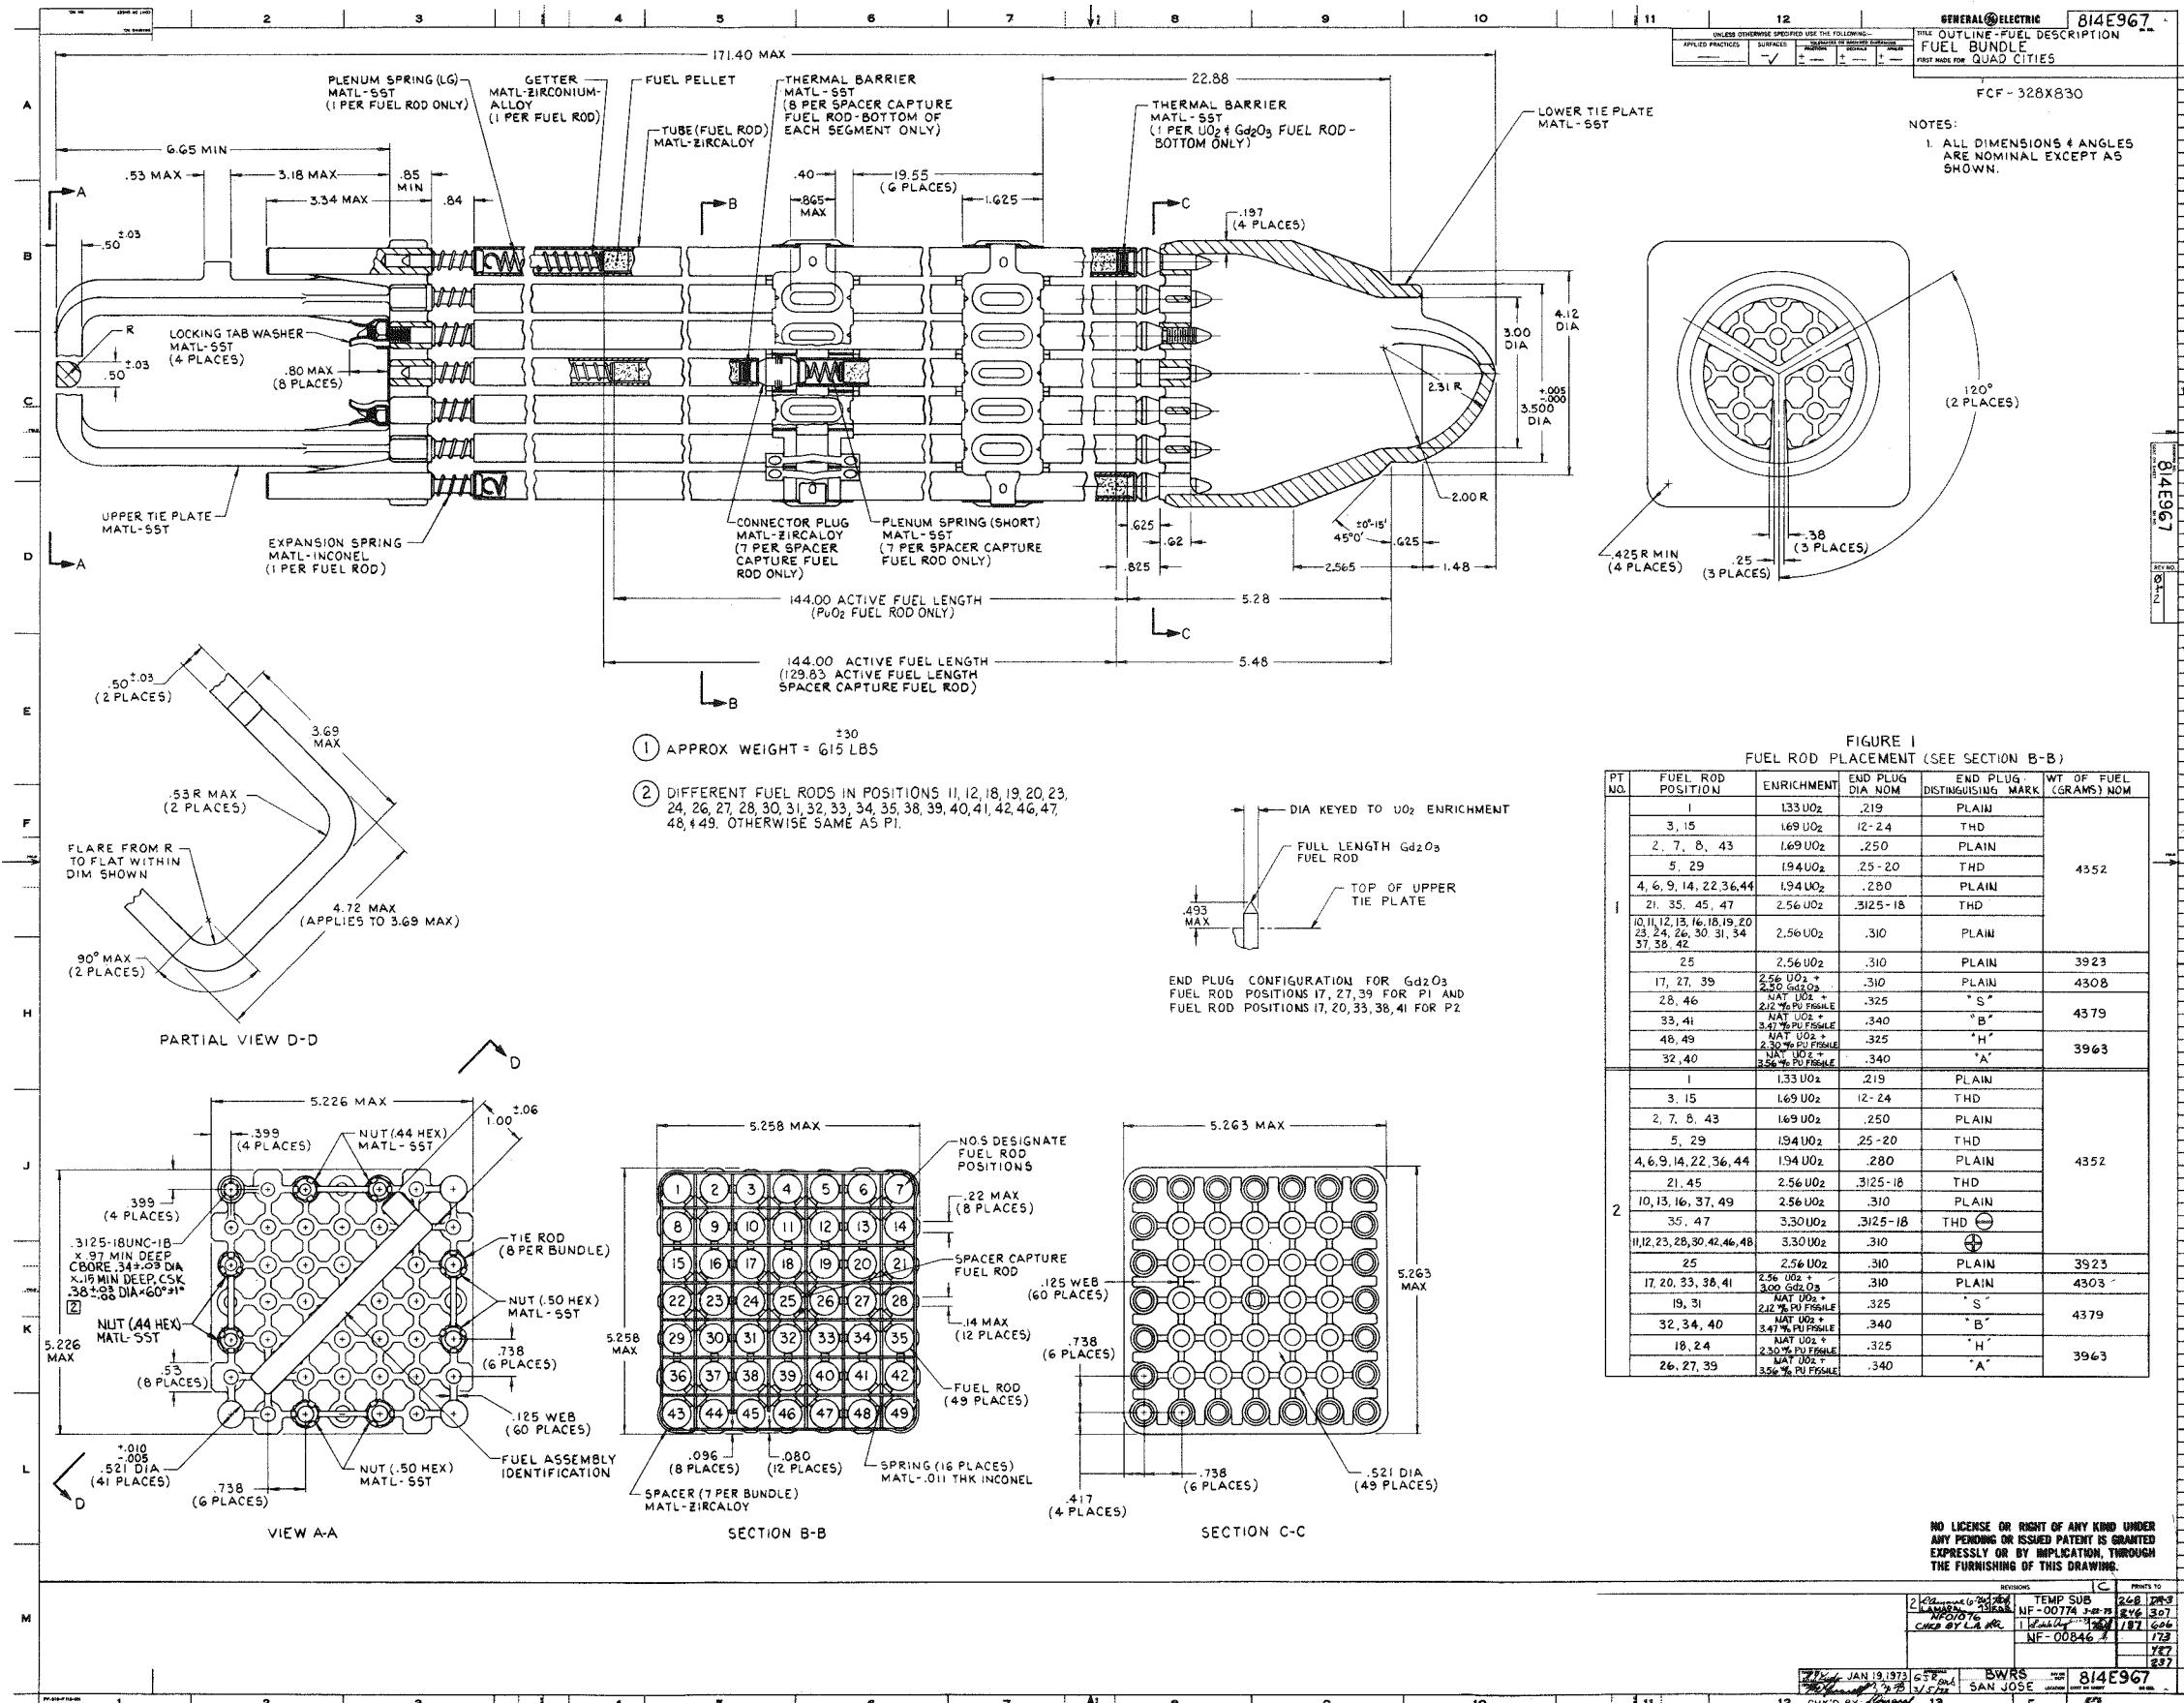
Fuel Assembly Drawing for MO₂ Test Fuel
